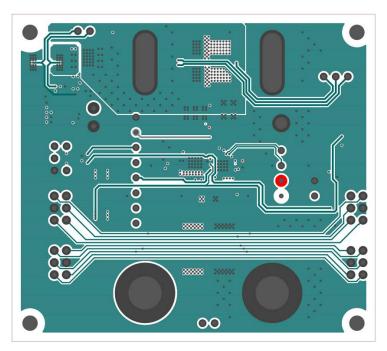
PCB - Inner Layer - Layer 3 (Top View)
